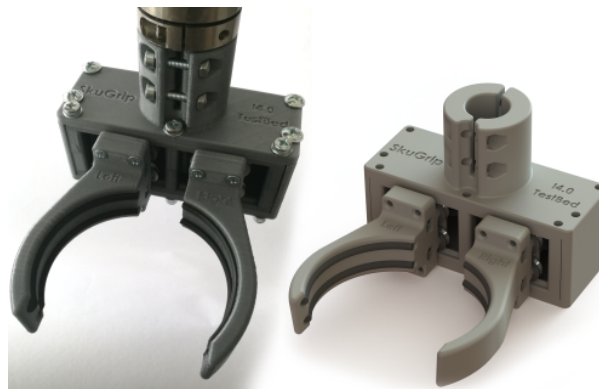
Gripper for manipulator - Demonstrates 3D printing for component manufacturing. (on the left side printed gripper, on right side 3D model)
